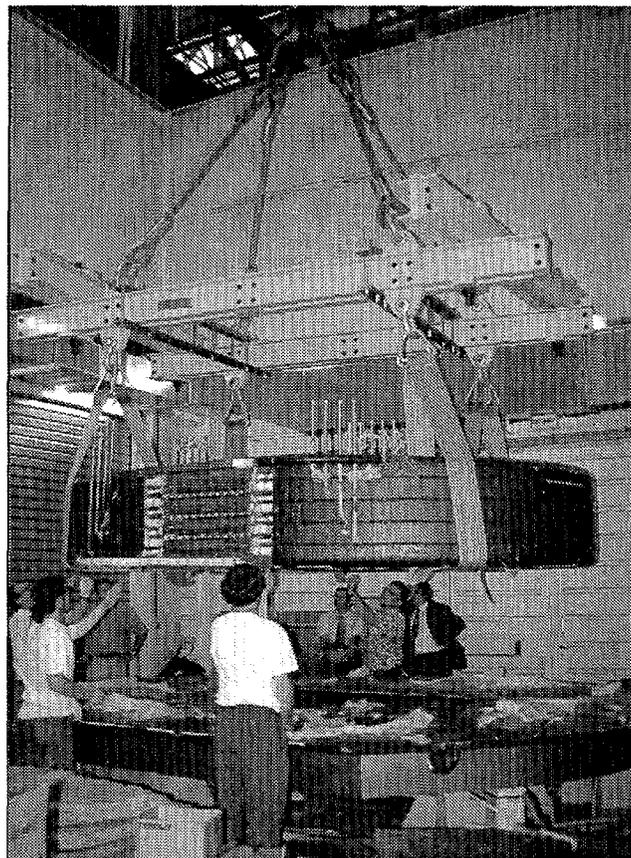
The impregnated winding pack consisting of five double-pancake modules
